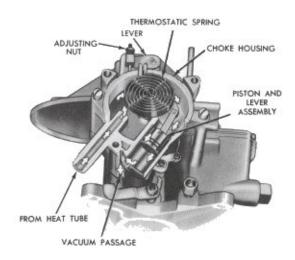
Ford Dual Carburetor Vacuum Piston Choke—Bottom View
